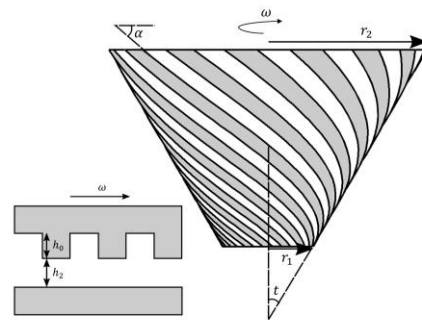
Diagram of a conical spiral groove bearing with geometry labeled. Subset shows the bearing gap with groove dimensions specified.
